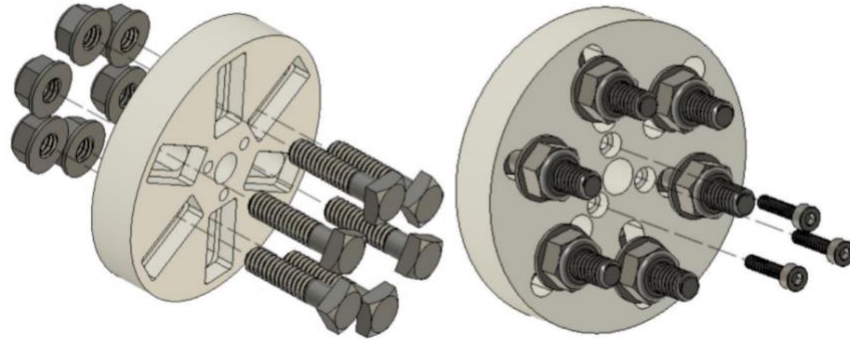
Grooved Plate Rotor Balancing Mechanism Exploded View.
